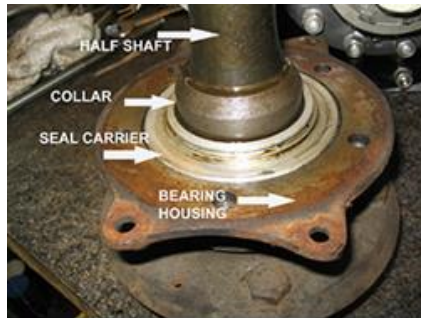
old half shaft and bearing assembly after withdrawal from the axle tube
